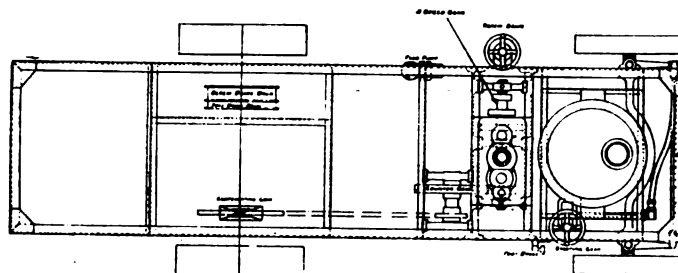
Plan of Chassis of Carter Steam Wagon.
